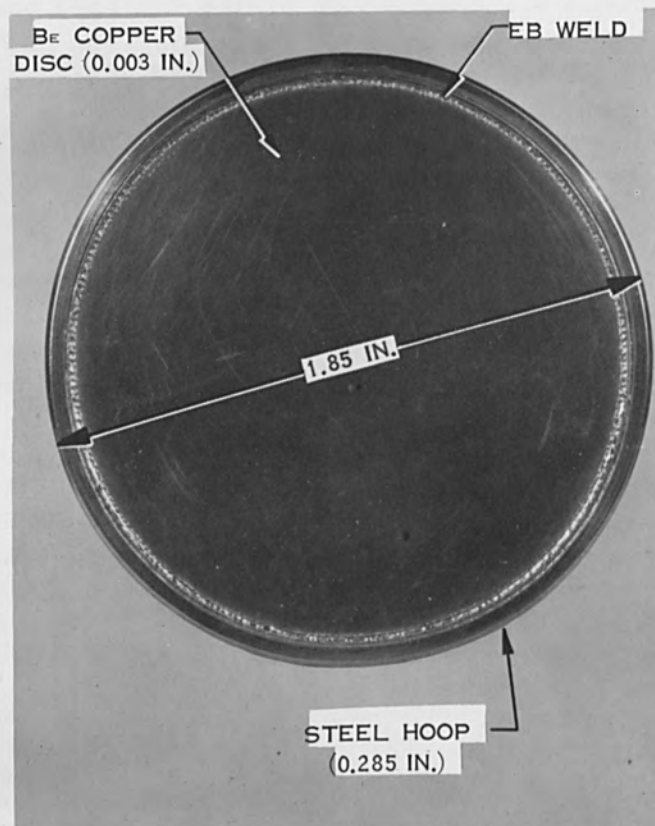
Hermetic Seal Copper Disc Welded to Steel Hoop
